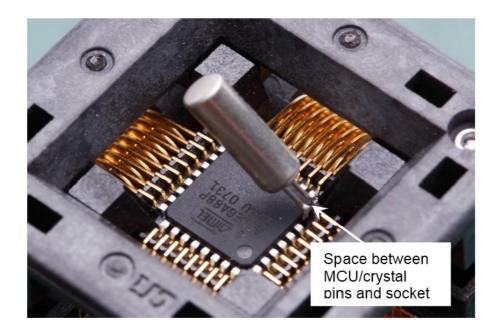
SMD Crystal Soldered Directly to MCU Using Pin Extensions
